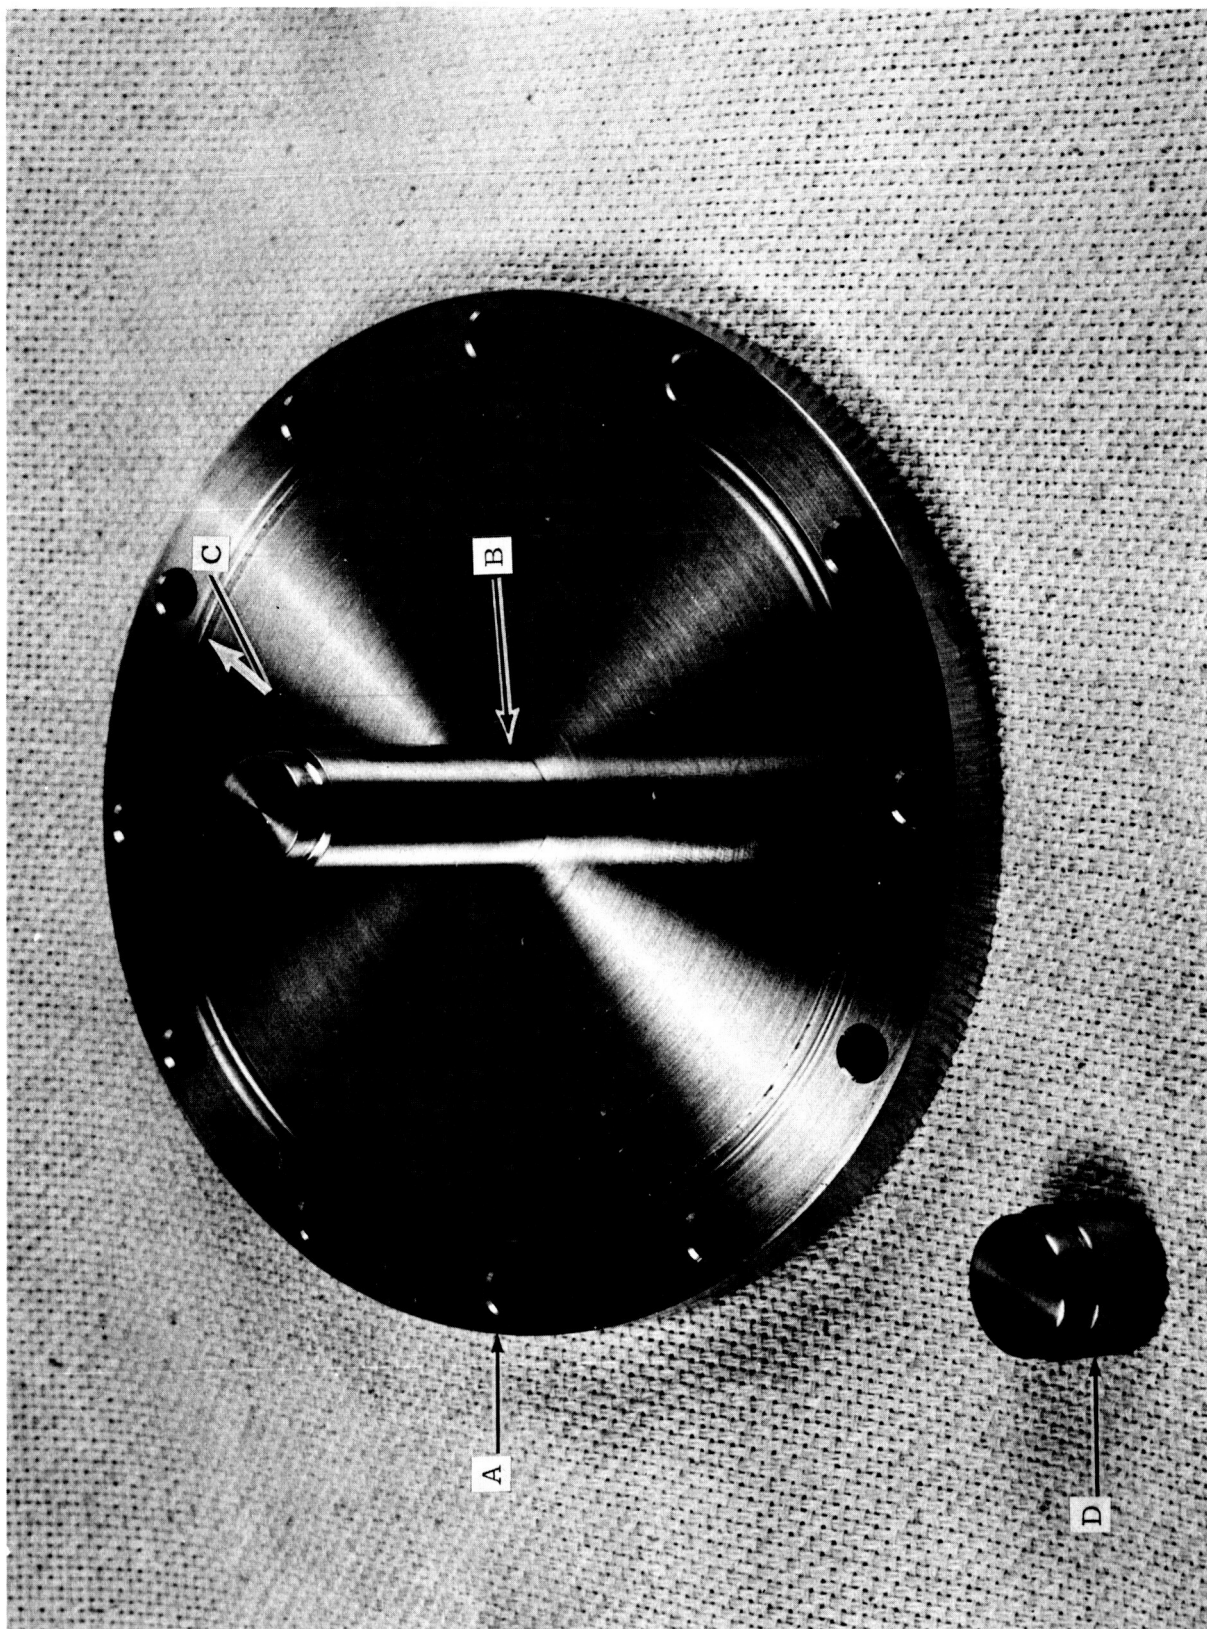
Top Vacuum Flange, Electrode and Contact Assembly
